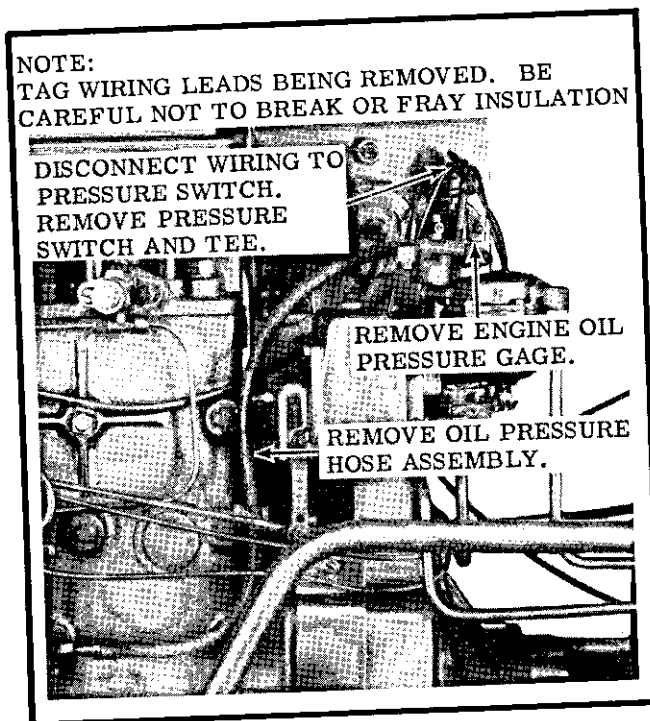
Engine Oil Pressure Gage, Removal and Installation
